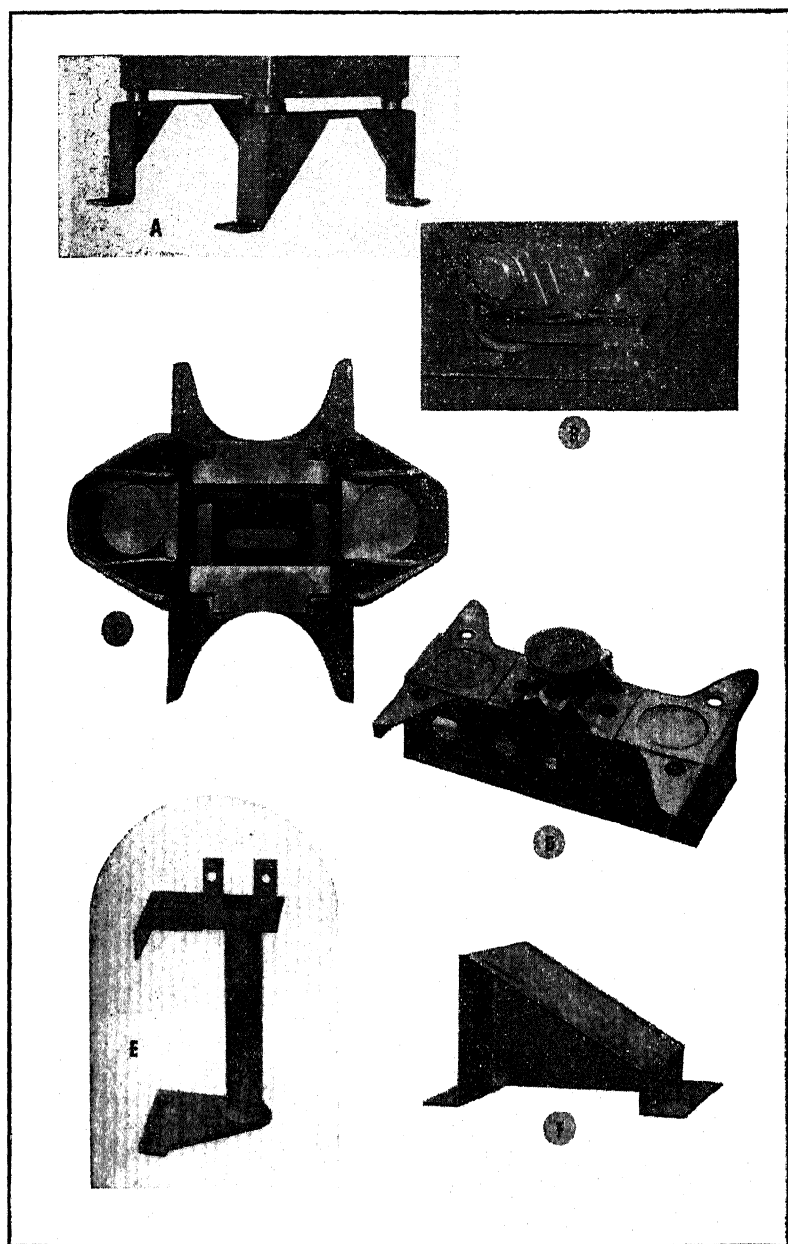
BASES—(A) Foot construction for sump tank. (B) Sliding base for motor. (C) Bogie frame stretcher. (D) Pony truck. (E) Valve controller stand. (F) Generator base for grain mill.
